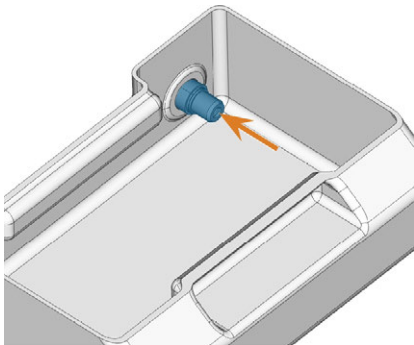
PUSHING THE COUPLING OUT OF THE TANK
